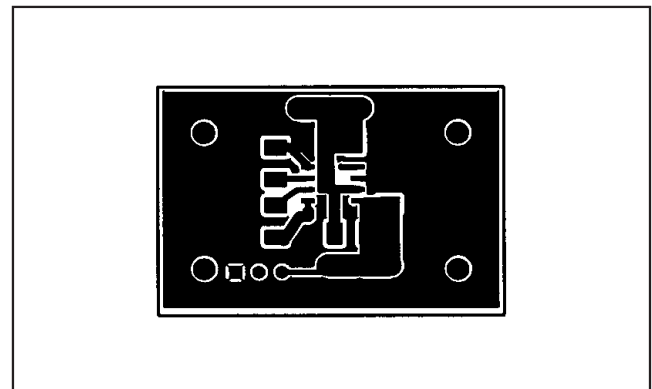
MAX662A EV Kit PC Board Layout—Component Side (1x scale)
